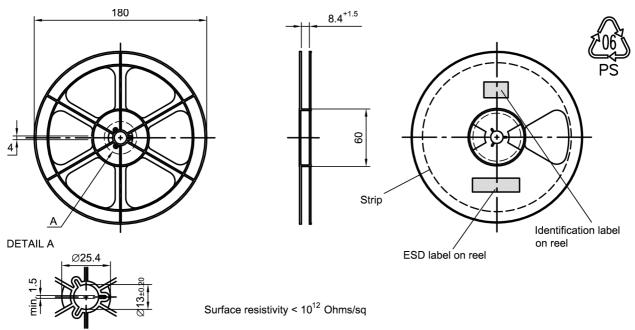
Drawing of reel (first-angle projection) with diameter of 180 mm.
